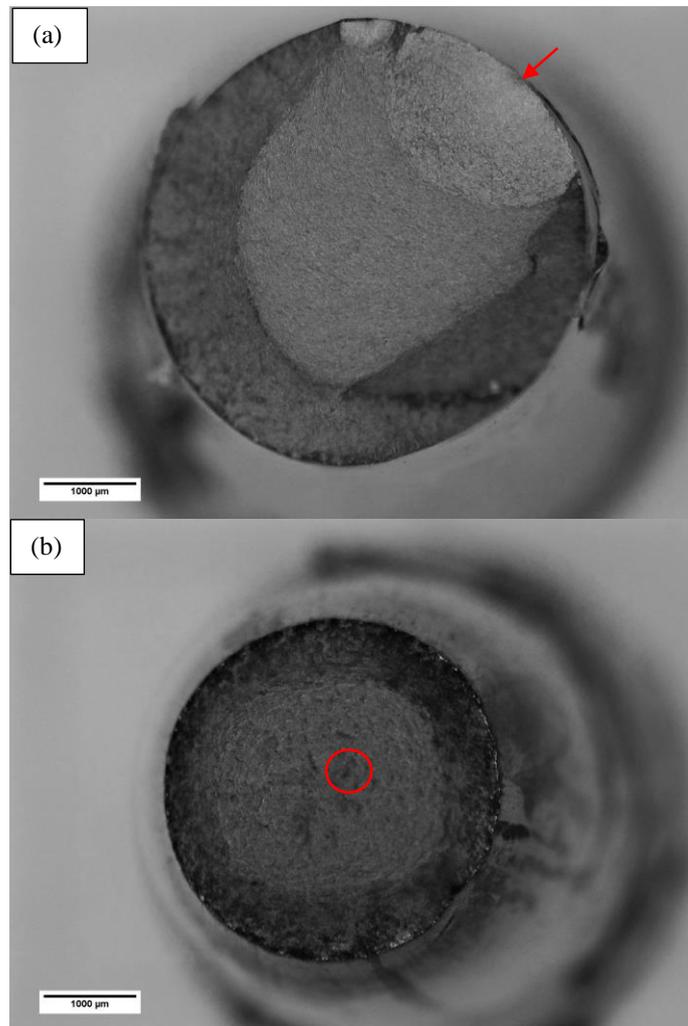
Typical fracture surfaces for (a) fatigue and (b) dwell-fatigue tests.
